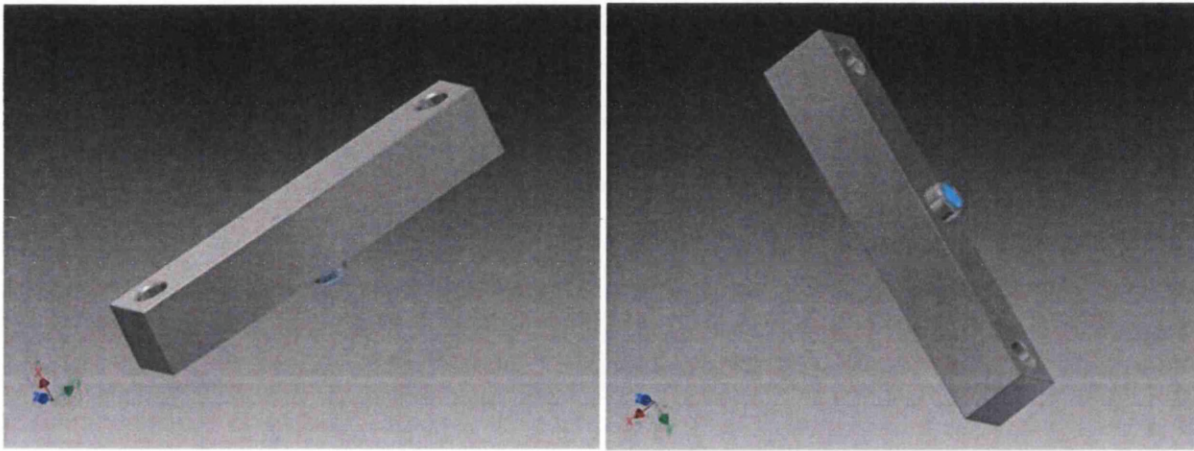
CAD Drawings of re-designed clamping plates.
